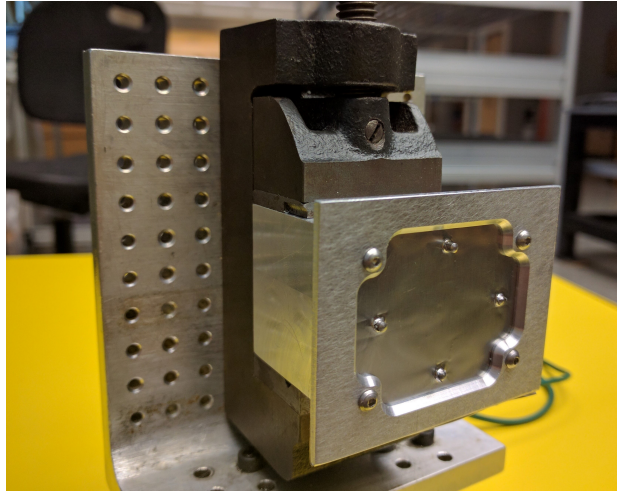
Fixture for micromilling machine. Faceplate is held on with four screws, and four alignment pins are used to position the layer for machining.
